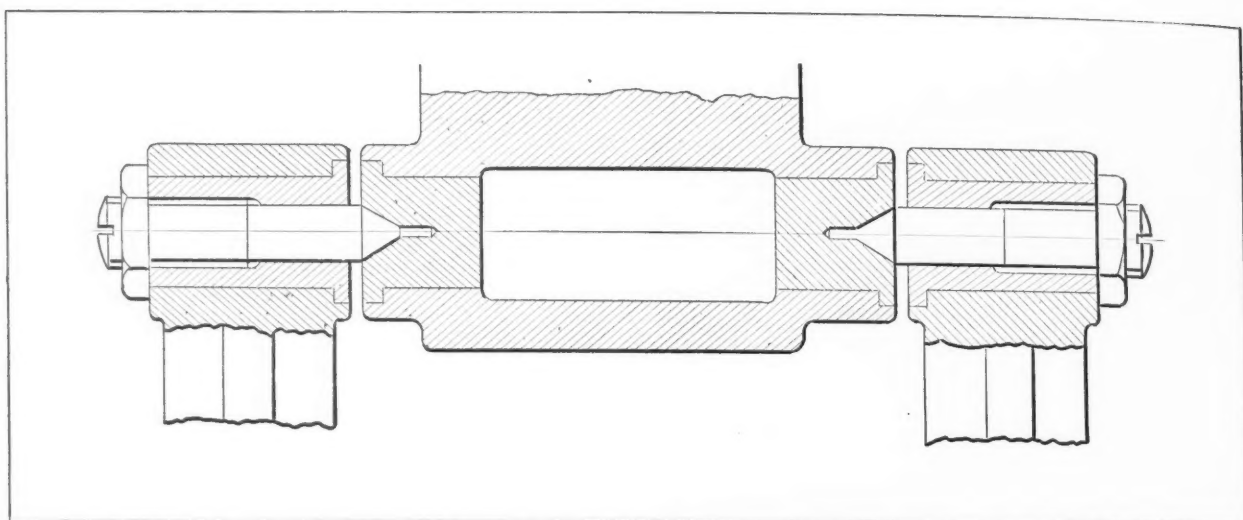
Pivot Bearing with Hardened Bushing Bearings
